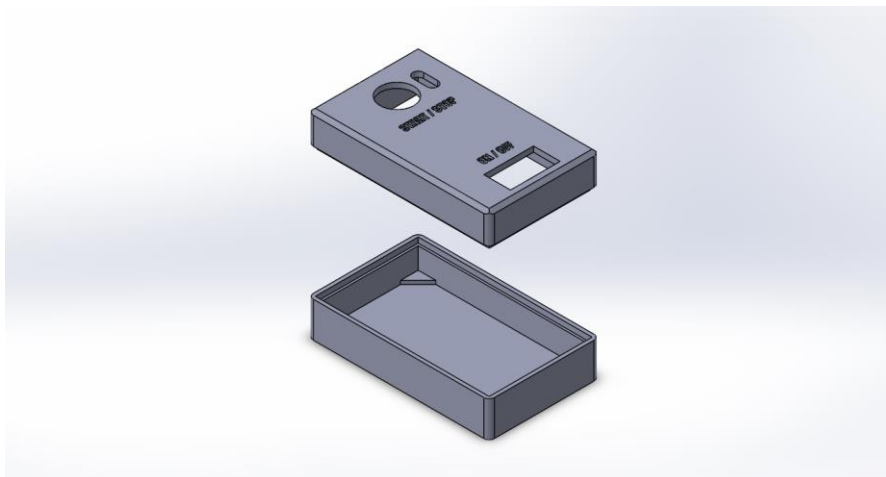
EXPLODED VIEW OF THE KILL SWITCH BOX
